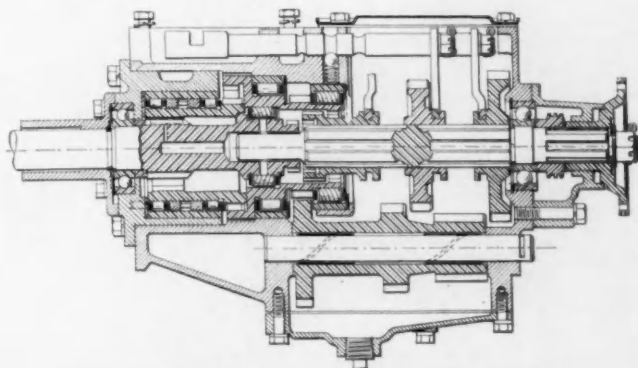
LATEST DURANT FOUR-SPEED DESIGN
